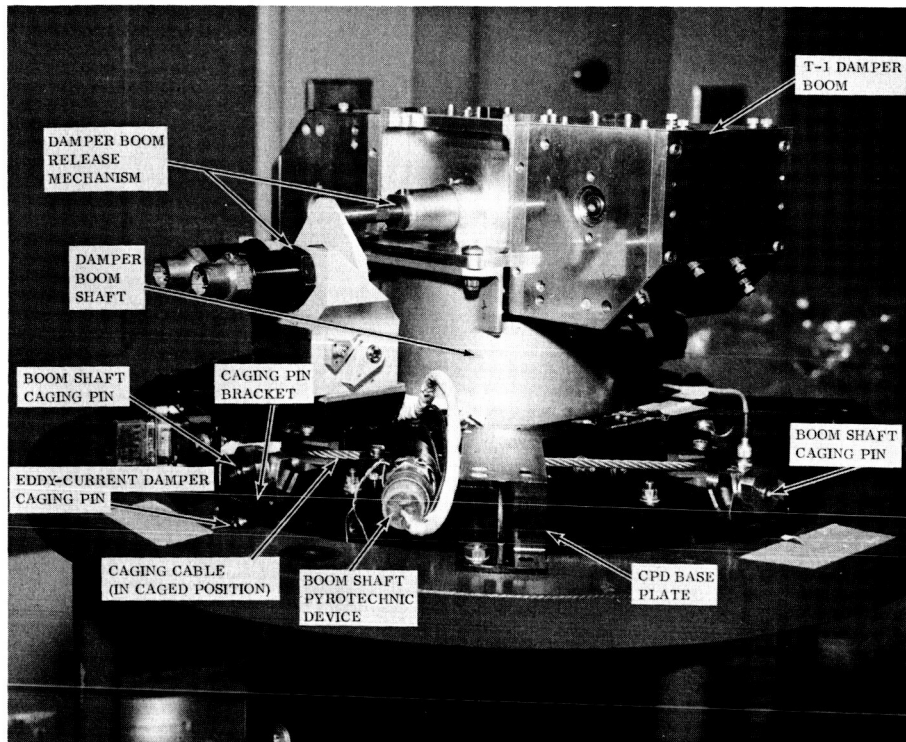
Baseplate and Caging Mechanism of CPD Engineering Unit 1 with Damper Boom Package in Place
